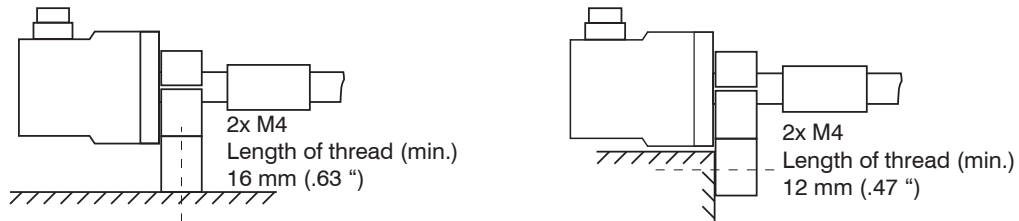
Sensor mounting with mounting kit MBS 12/8
